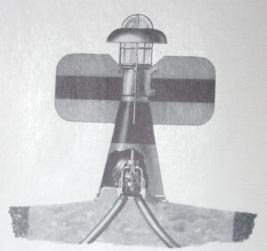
Type APB Broken-away View showing Details of Plug and Receptacle
